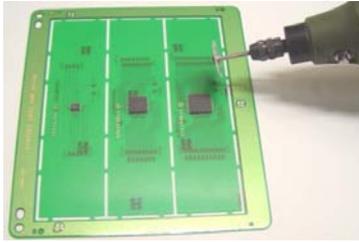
Example of Attaching Strain Gauge and Guide Mark Dimensions
